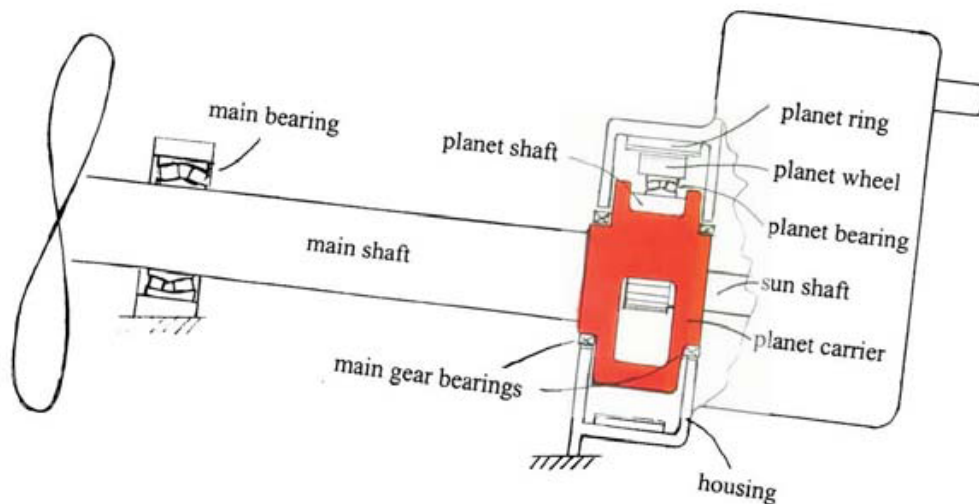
Drivetrain model of 600 kW turbine used in the modelling [29]. The present 500 kW turbine has two main bearings in front of the gearbox. They are connected with the gearbox(see Figure 5).
